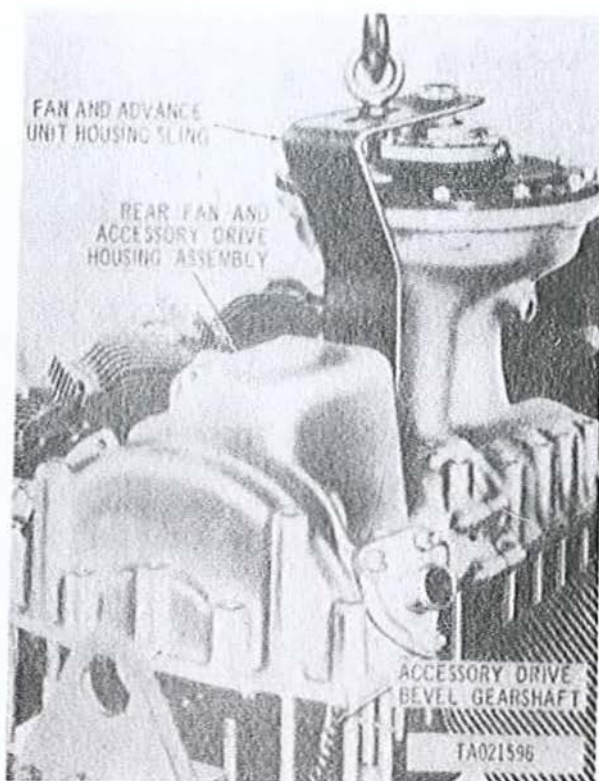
Installing rear fan and accessory drive housing using fan and advance unit housing sling.
